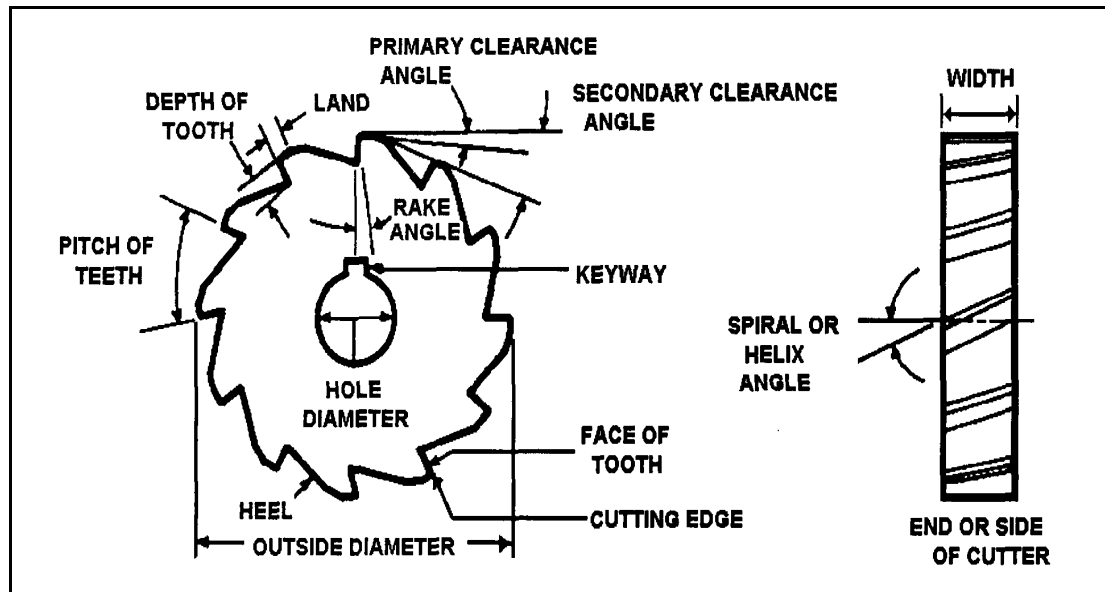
Milling cutter nomenclature (Milling Machine, Anon p.8-3)
